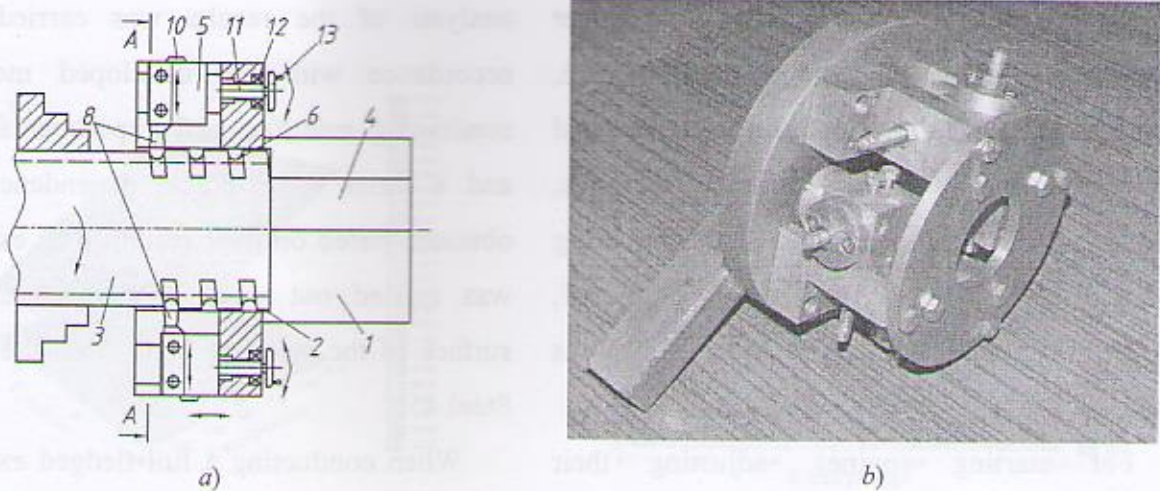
The device for cutting the screw groove of the working body of the extruder: a) a structural scheme for cutting grooves; 1 – clamping chuck; 2, 3 – workpiece; 3, 1 – rest of the machine; 4 – holder of the device; 5 – cutting tools; 6, 8 – cutters; 7, 6 – screw groove workpieces; b) general view
